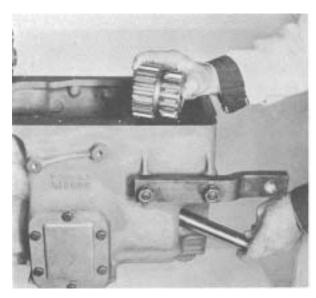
Install reverse idler gear as shown. Insert idler shaft through case and idler gear. NOTE: Idler shaft lock groove must line up with lock bolt hole. Drive shaft into position. Install shaft lock and bolt. Tighten bolt 20 to 25 ft. lbs. torque [27,2 - 33,8 N.m].
